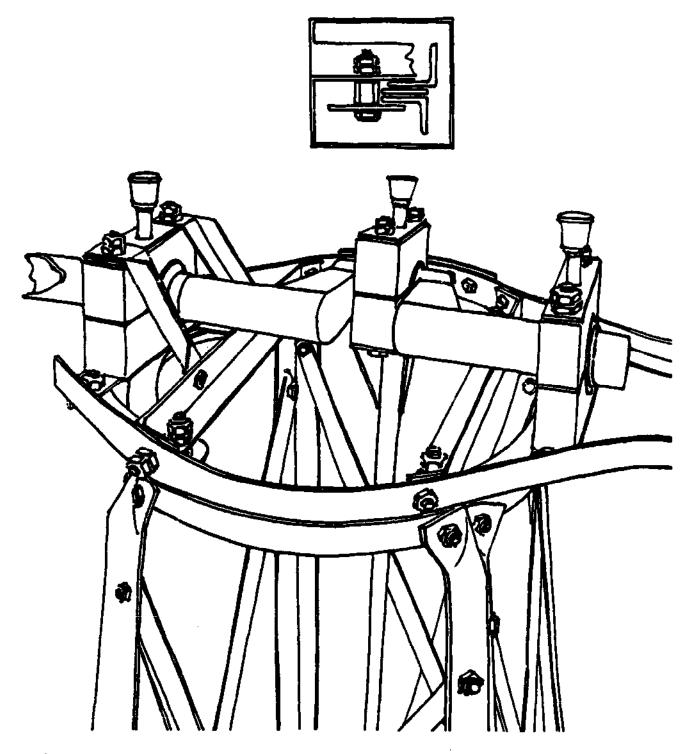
Overall view of 24-ft windmill tower head, chassis, and main shaft, with detail of lift arrester
